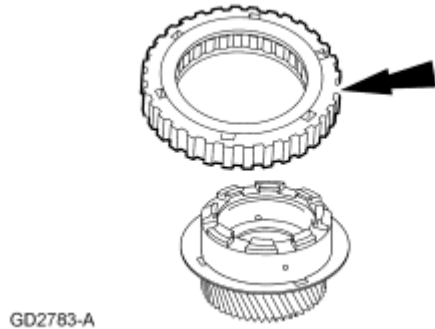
Forward One-Way Clutch Outer Race & Sprag Assembly
